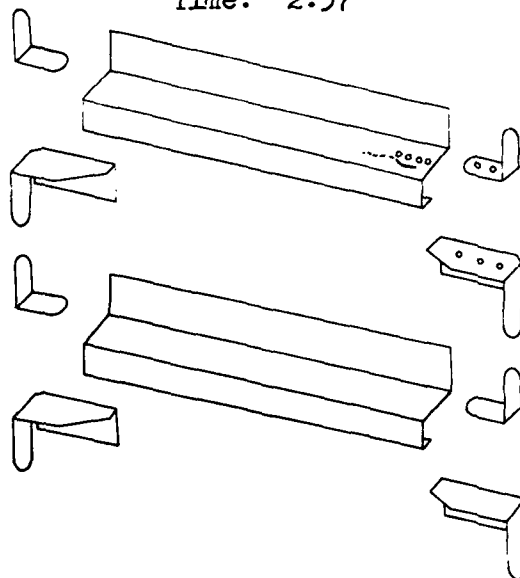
Schematic of Typical Stringer-Bulkhead Connection.
